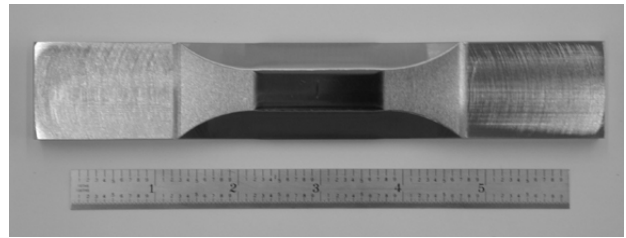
The LPB treated surface patch in the gage section of a thick section specimen.
